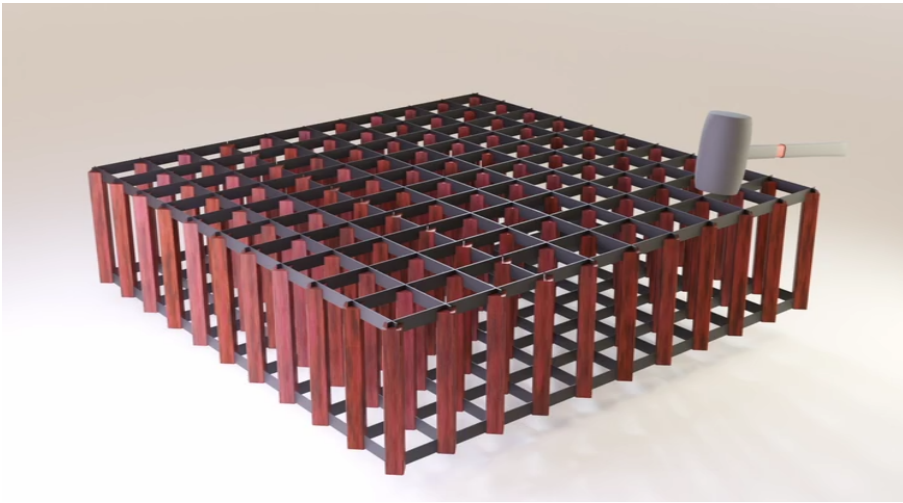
Both frame sections engaged and driven down onto the slat ends.
